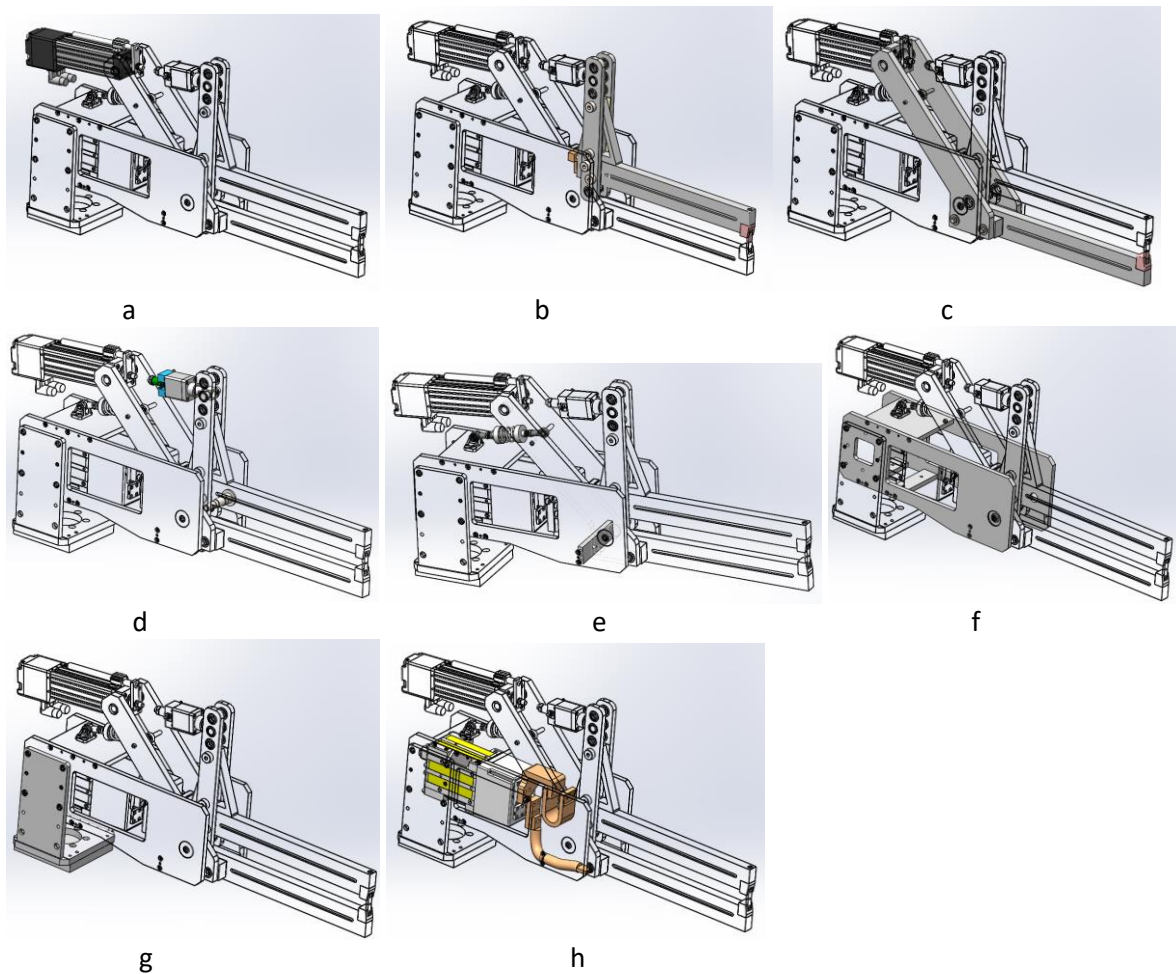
Components of the design. a) Motor, b) Upper arm, c) Lower arm, d) suspension system, e) position system, f) enclosure, g) robot mounting, h) transformer with connections.
